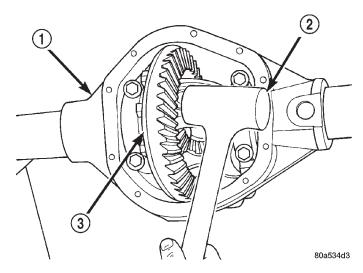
Seat Ring Gear Side Differential Dummy Side Bearing
